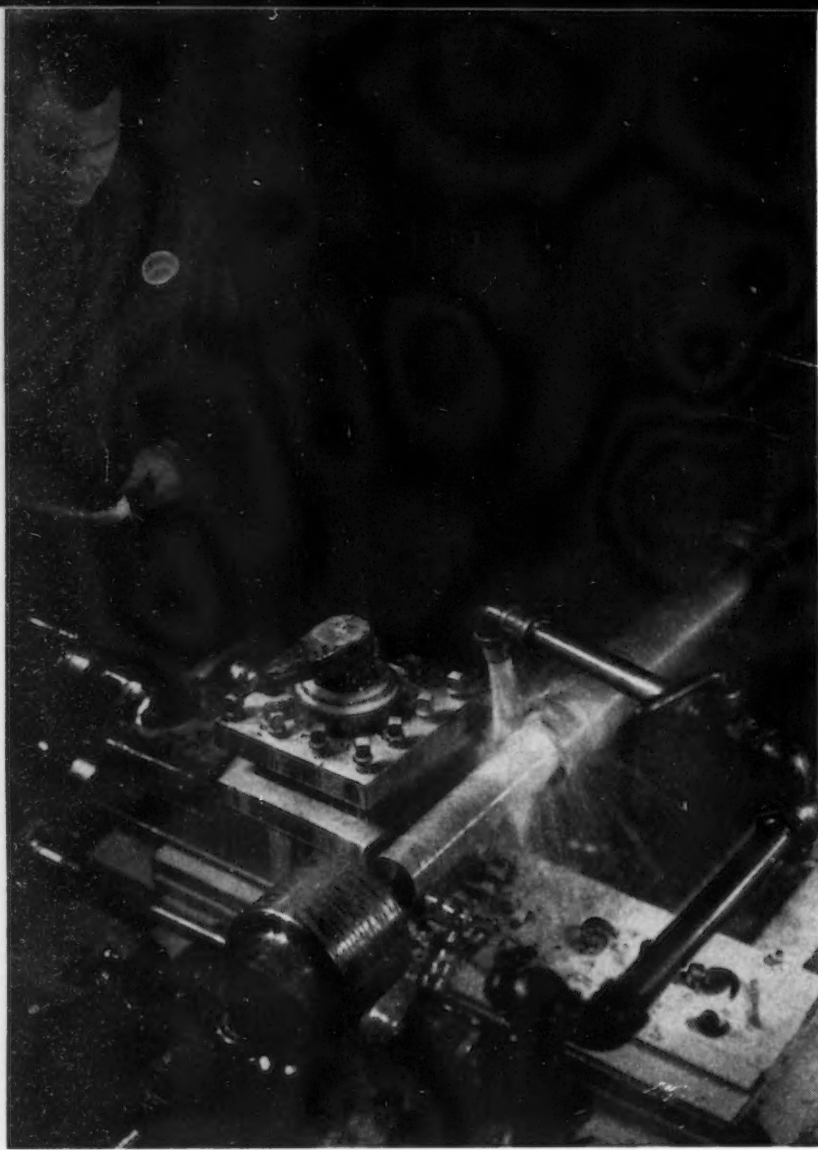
Turning a 3¼-in. S.A.E. 2350 steel shaft with a carbide tool. Cutting speed = 247 ft. per min.; feed per min. = 9.250 in.; feed per rev. = 0.028 in.; maximum depth of cut = 33/64 in.; cutting time per piece = 2.55 min.; former time using H.S.S. tools = 6 min.; maximum metal removed per min. = 35.3 cu. in.
